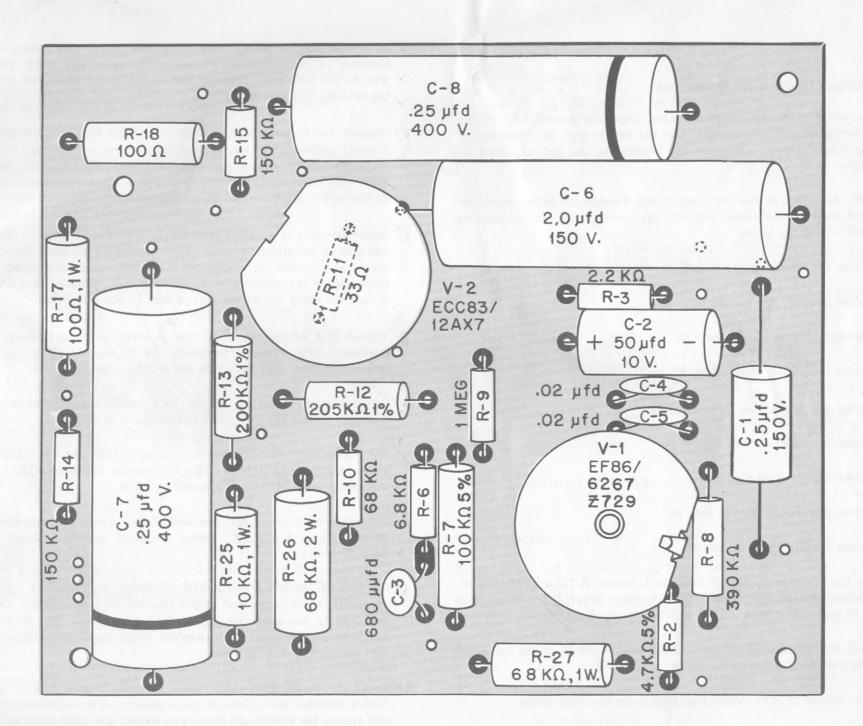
MOUNTING PARTS ON PRINTED CIRCUIT BOARD 820048
